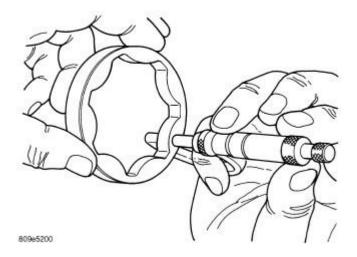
MEASURING OUTER ROTOR THICKNESS Courtesy of CHRYSLER LLC
